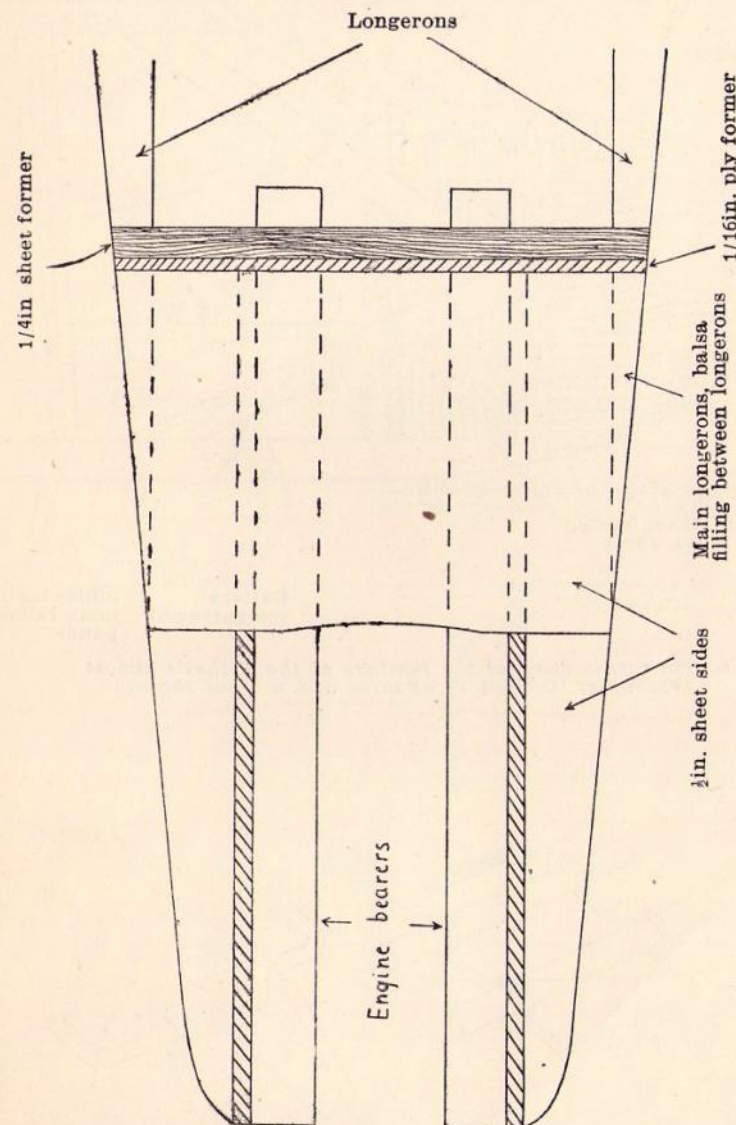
Plan view of the engine mounting in the author's 'Dragon V'.
